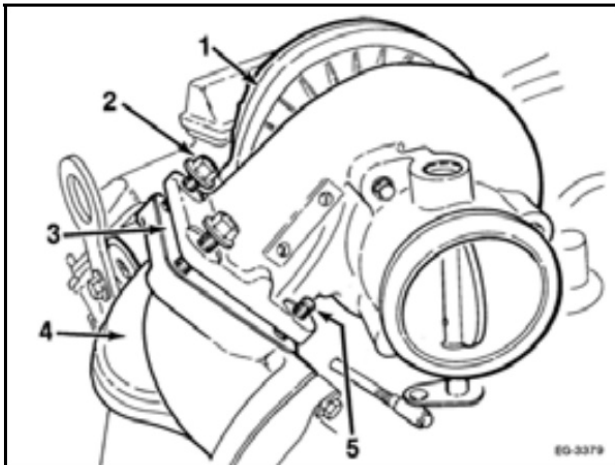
Removing Turbocharger From Inlet Adapter, Late 1997 Model Year Engine Without Exhaust Bellows Feature Shown
